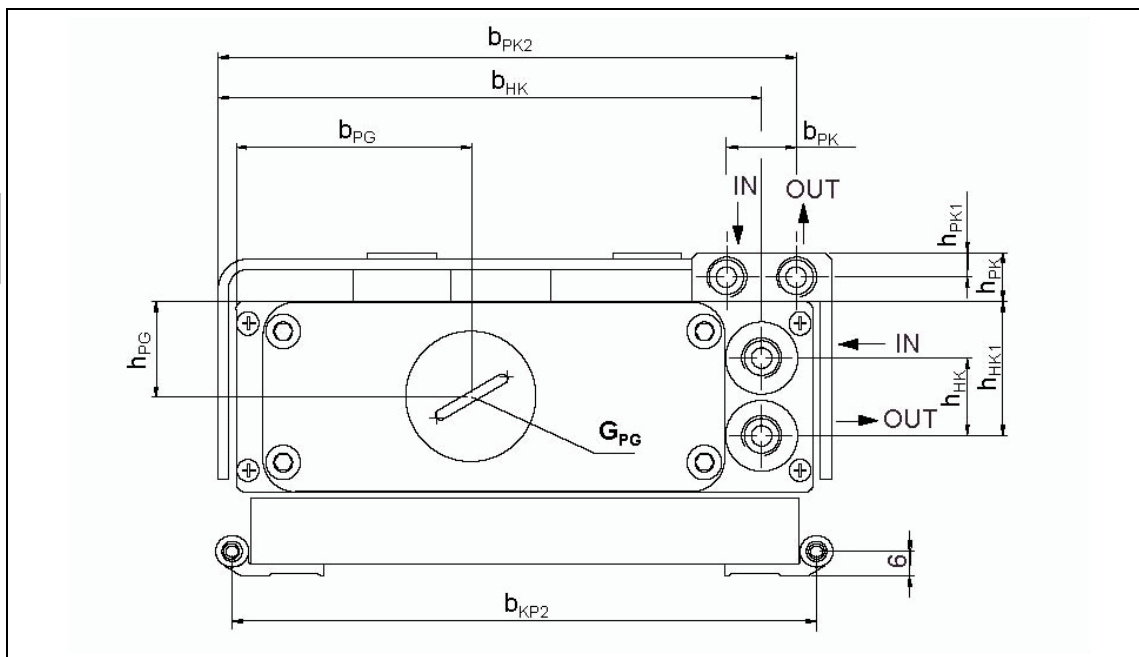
Layout of the 1FN3 connectors (face top view)
